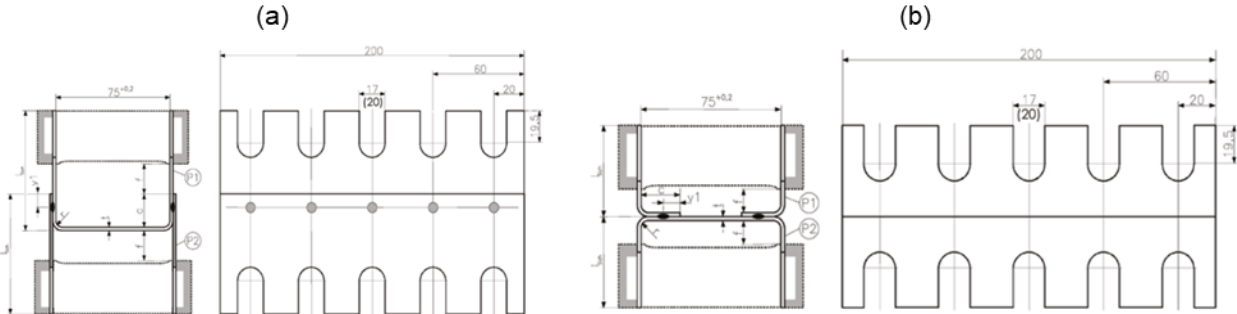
H-specimen geometry used for multiple spot weld fatigue tests for (a) shear, and (b) peel, loading conditions [60]
